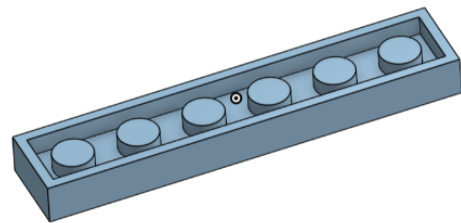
CAD model of version 1 of the soft pneumatic wheel top mold
